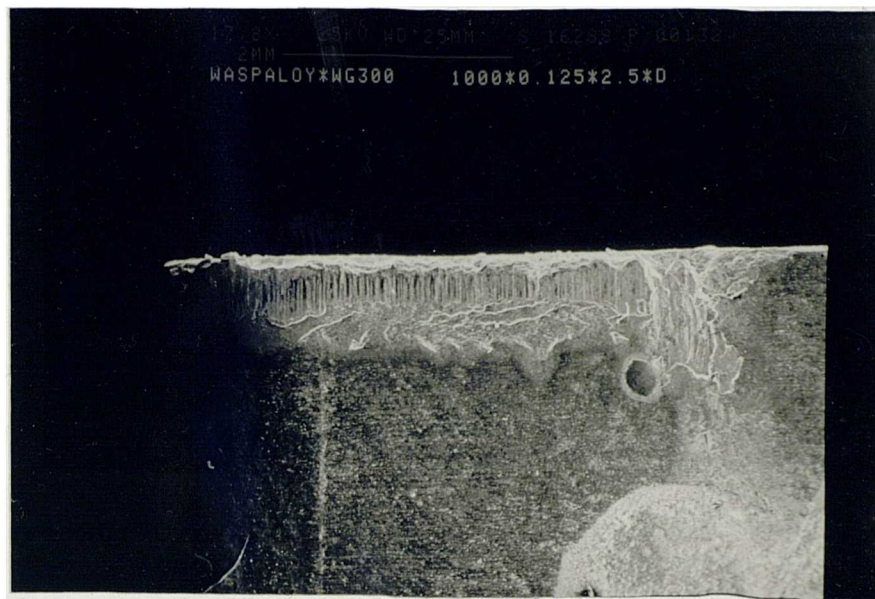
Overall view of the flank wear of WG-300 used to machine Waspaloy, ( $V=300\text{m/min}$ ,  $F=0.125\text{mm/rev}$ ,  $\text{DOC}=2.5\text{mm}$ , Dry)
